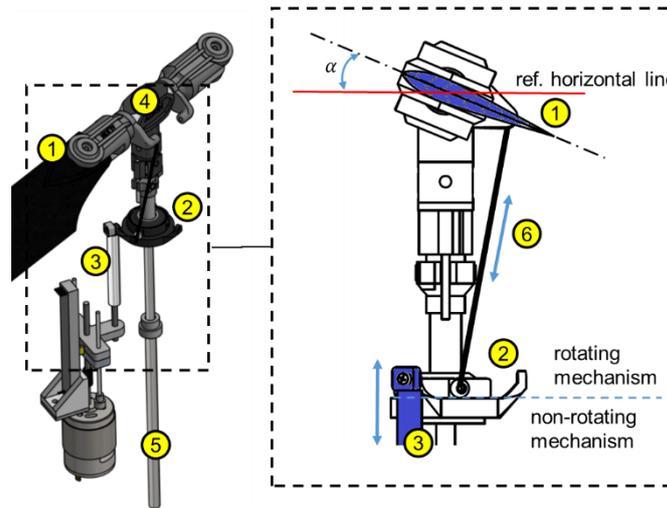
Blade mechanism: 1 – blade; 2 – swashplate; 3 – servo rod.
